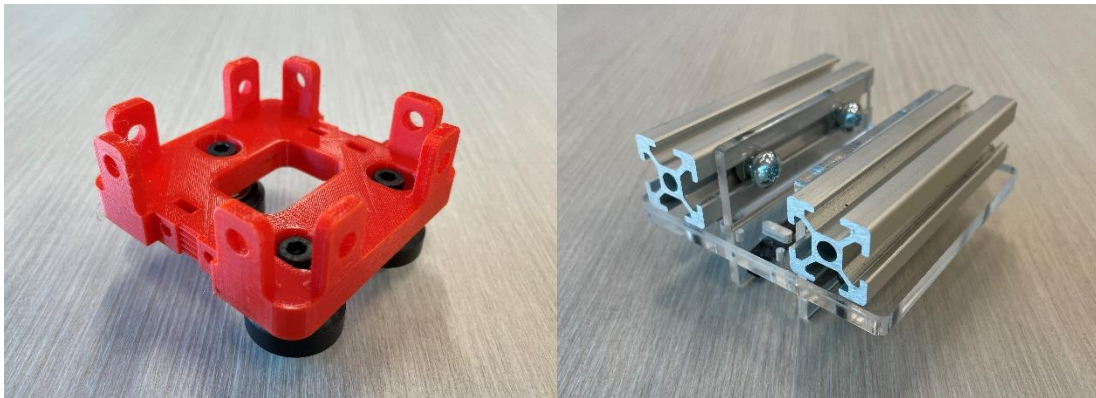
Left: Old Carriage Design; Right: New Carriage Design
